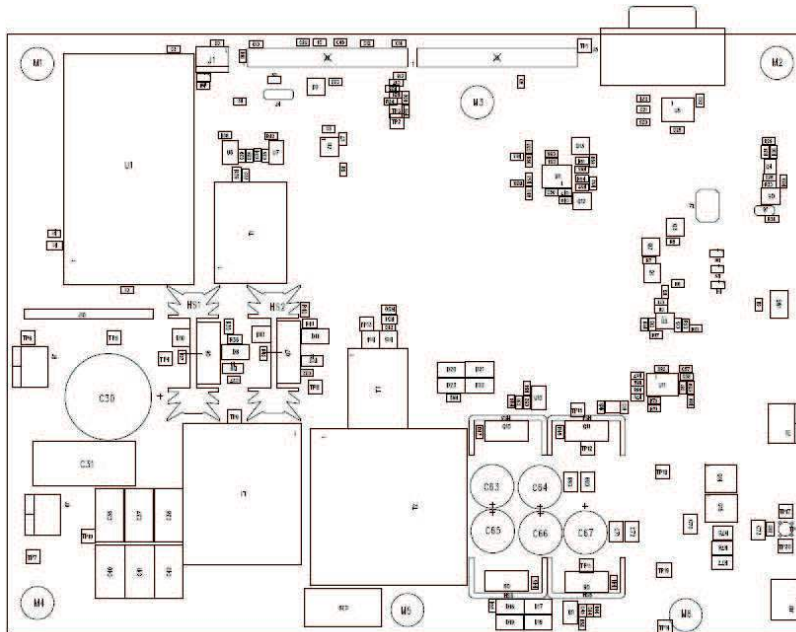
UCD3138LLCEVM-028 Top Layer Assembly Drawing (top view)
